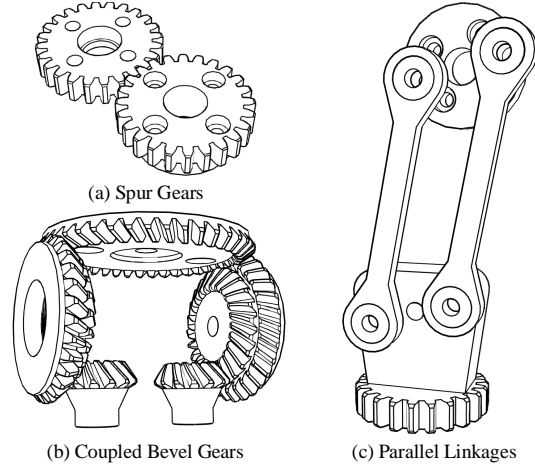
Transmission Mechanisms. We show three design primitives in ToddlerBot’s mechanical design: spur gears, coupled bevel gears, and parallel linkages.
